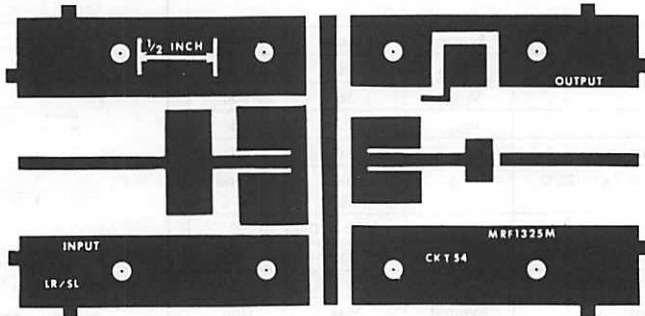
PRINTED CIRCUIT BOARD LAYOUT — 1090 MHz TEST CIRCUIT
